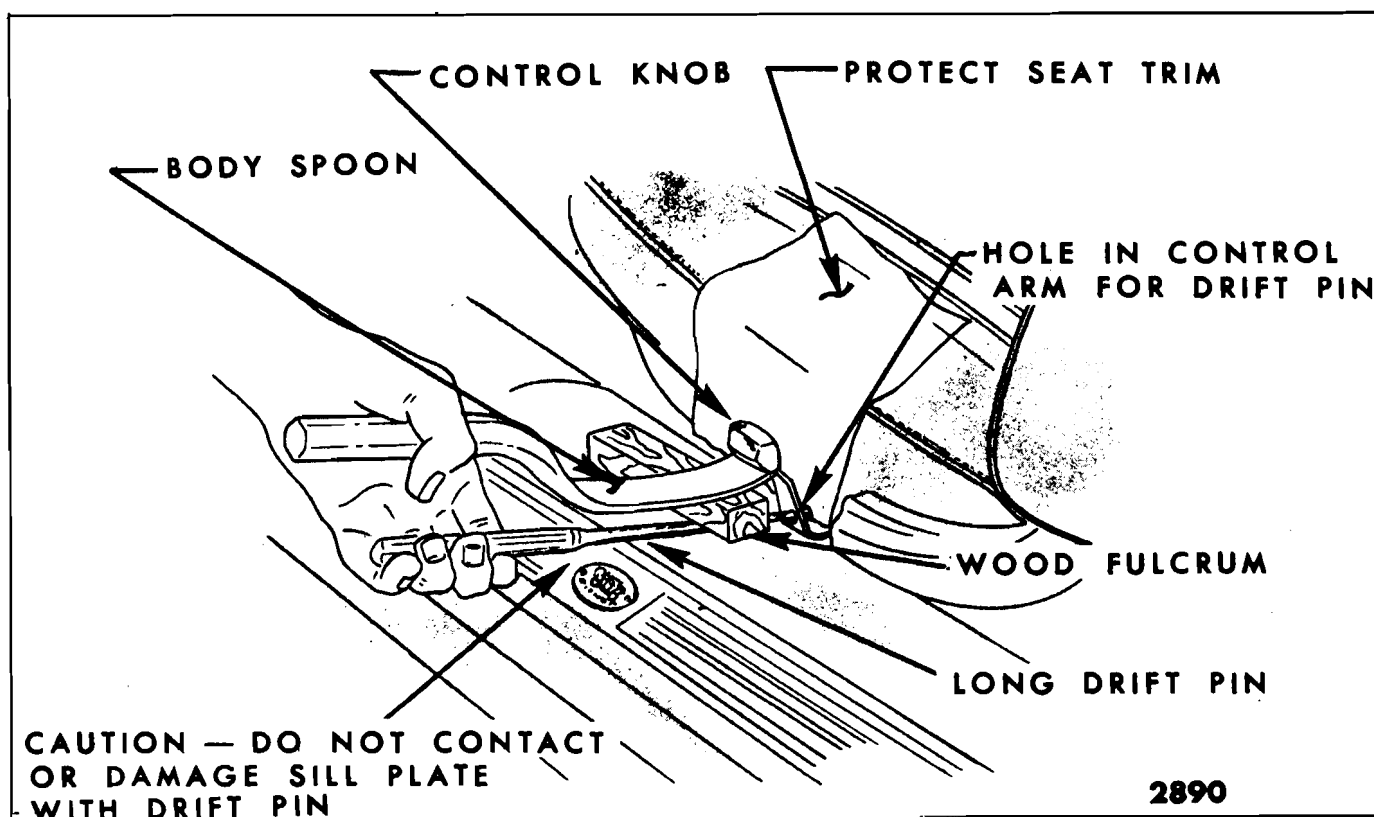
Front Seat Adjuster Control Knob - Removal
